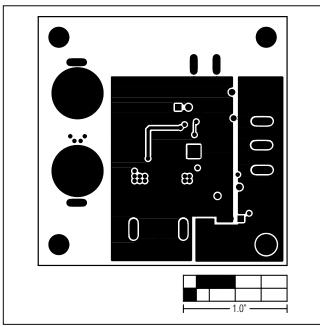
MAX16922 EV Kit PCB Layout—Layer 3 (PWR)
